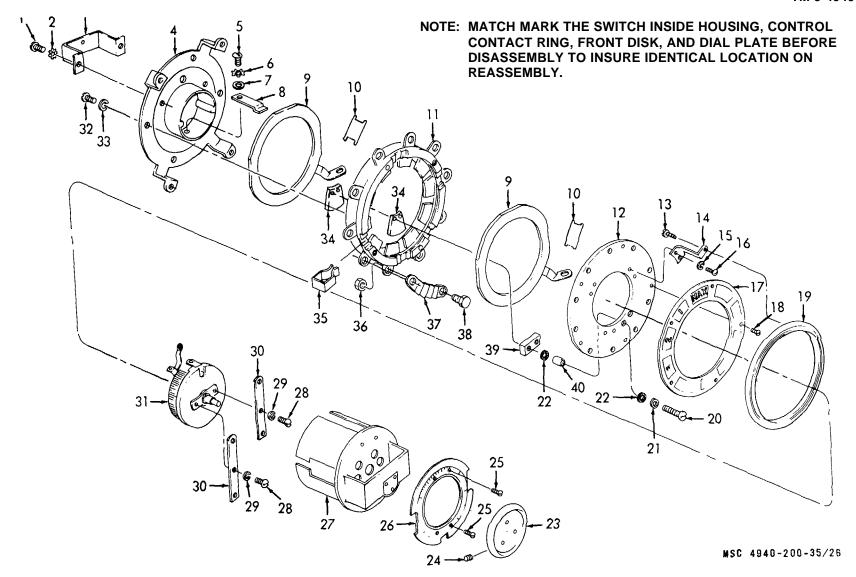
Ten-range switch and field rheostat, disassembly and reassembly.
